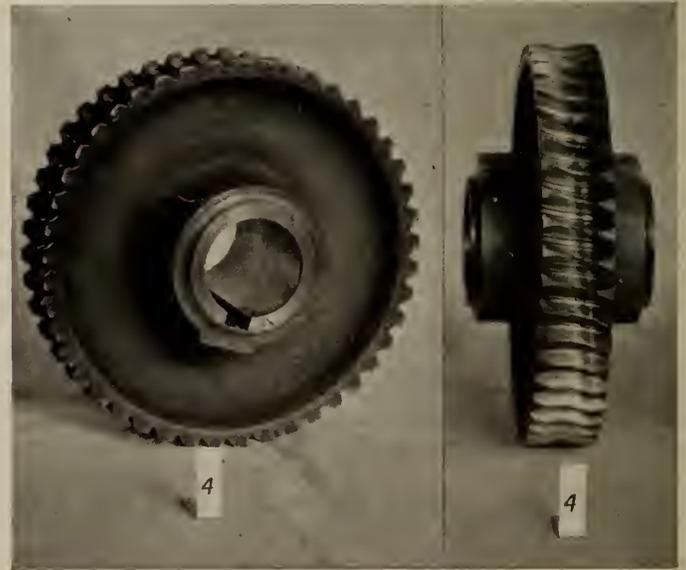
Worm Gear after Test to Destruction, .4 inch c.p., 30-degree p.a. to Mate Single Thread Worm.
